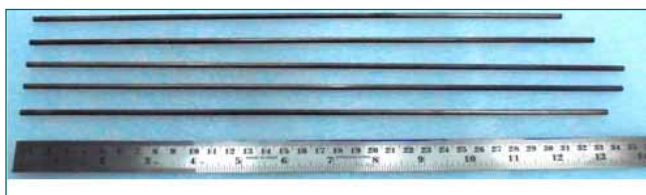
Photograph of qualified U 6 Wt.% Zr alloy slug with coated mould.
